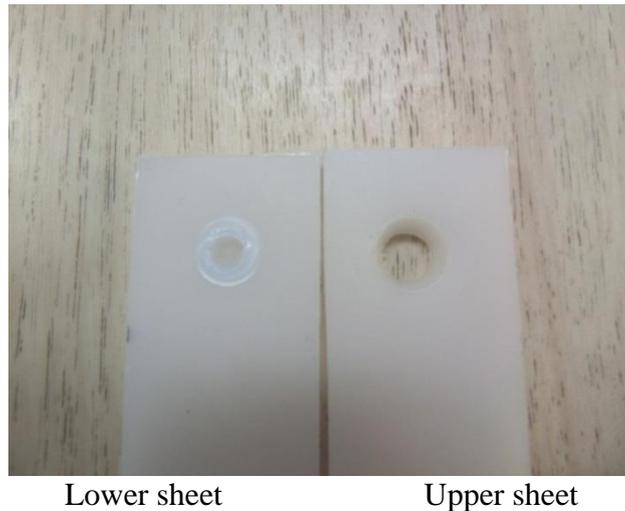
(b) Pull out nugget with lap shear force = 900N
